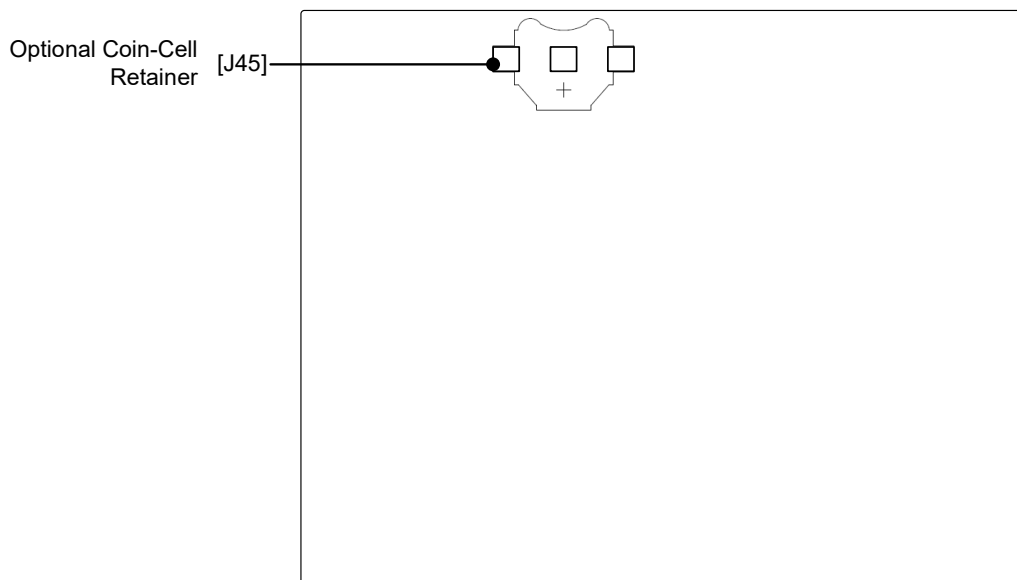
Jetson Nano Carrier Board Placement – Bottom View
